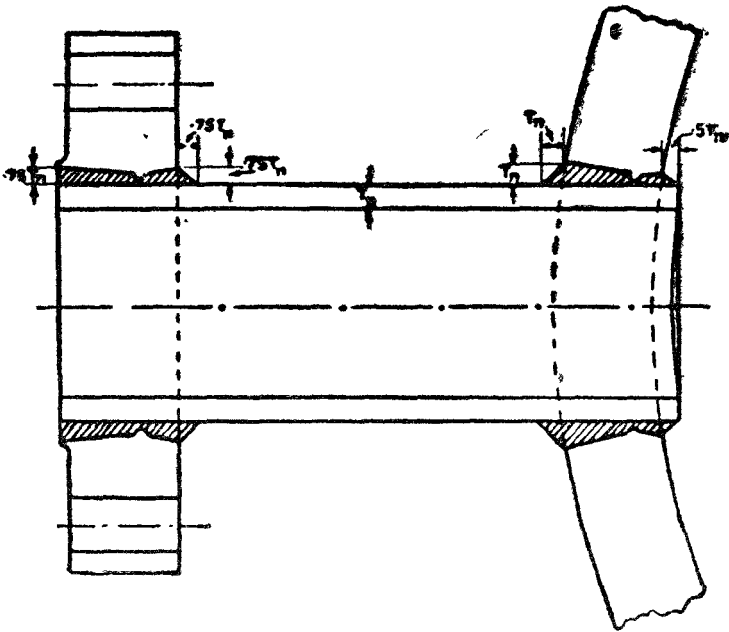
Minimum weld attachment for stand pipes over 4 in. bore where a compensating ring is not required and minimum weld attachment of flange to stand pipes over 4 in. bore.
